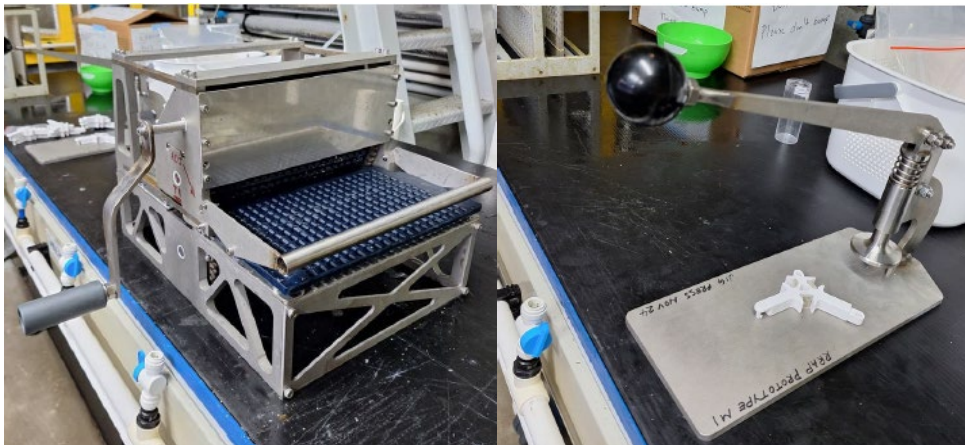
Jig Cutter prototype (left) and Jig Press prototype (right).
